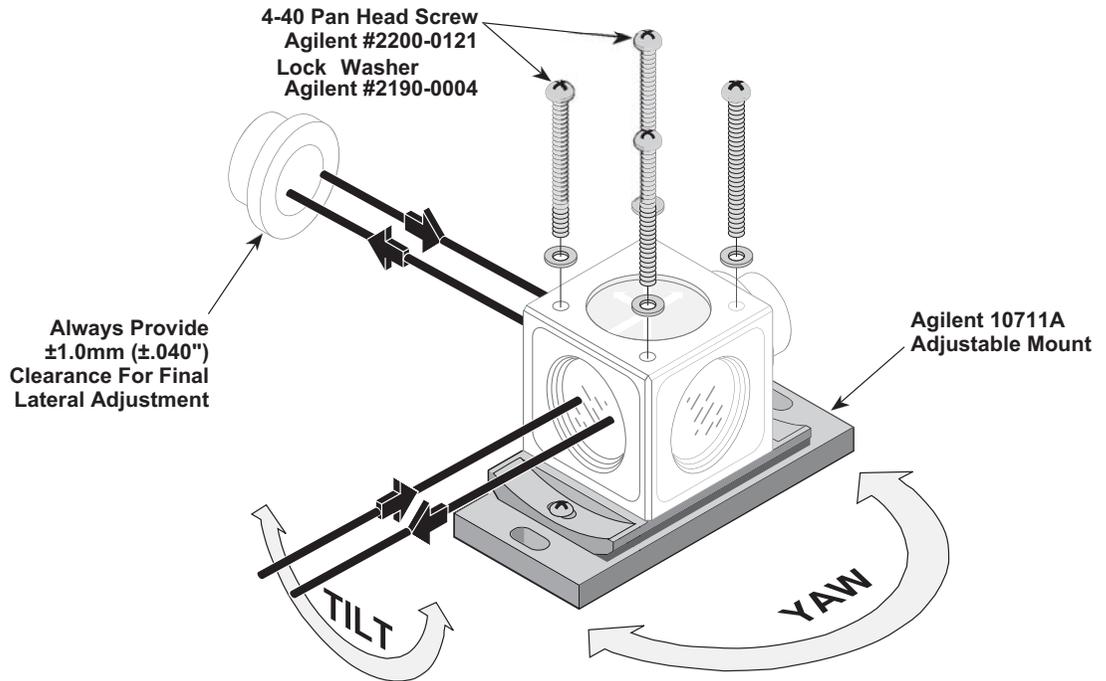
Horizontal plane mounting using the Agilent 10711A adjustable mount
